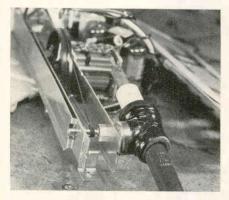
Taping a speaker's PM magnet to a solder iron permits it to be magnetically clamped to a chassis or serve as a "solder stand" when not being used.
